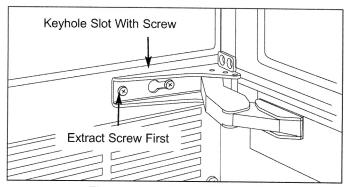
Hinge Removal Bottom Hinge Shown
